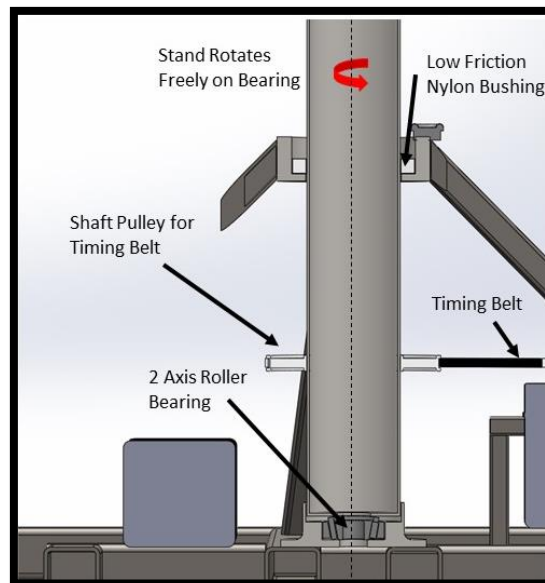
Rotating Shaft Assembly of Commercial Base Design
